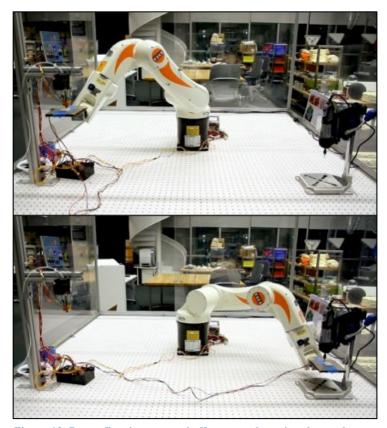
By configuring external effectors and moving the work piece, a single fixturing and calibration can serve many processes. The top image shows an ABS part being 3D printed and subsequently undergoing surface milling in the bottom image to achieve a better finish.
